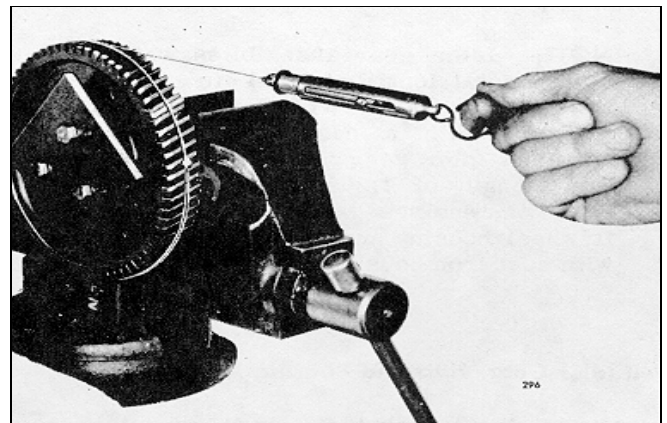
Checking Pre-Load of Idler Gear Bearing
